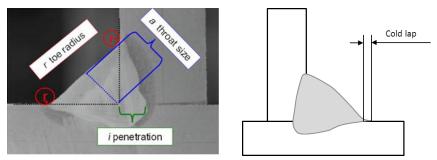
Toe radius, throat size, penetration and cold lap in a fillet weld [1].
